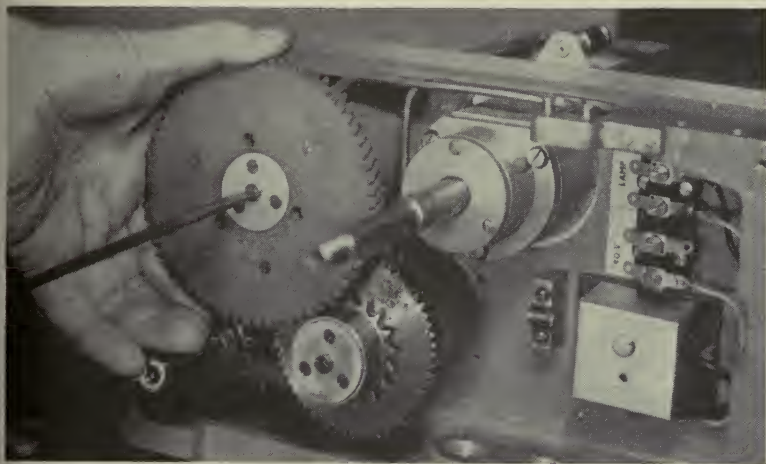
Rear view of soundhead; flywheel, and driving pulley removed.
